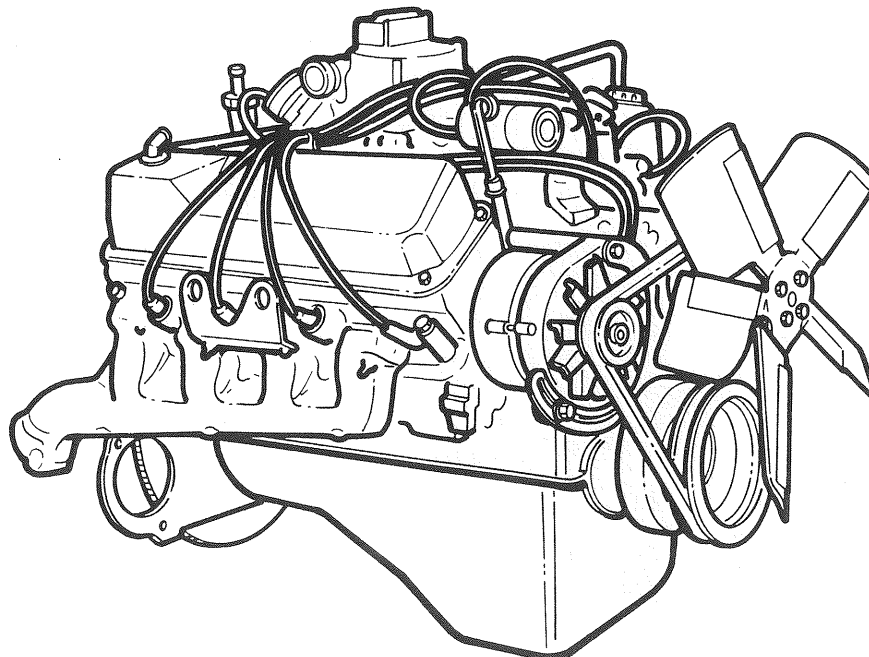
WSG-858 Engine — Typical (Left 3/4 Front View)
